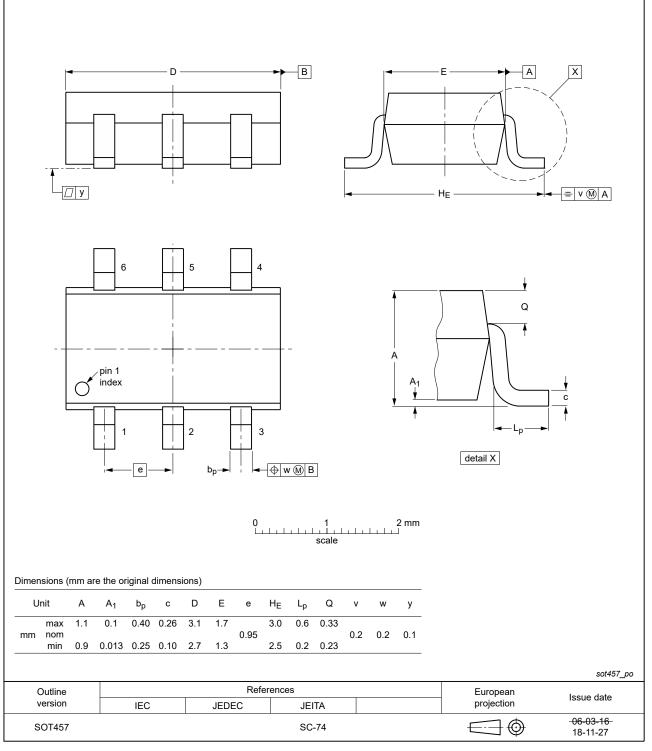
Package outline SOT457 (SC-74; TSOP6)
